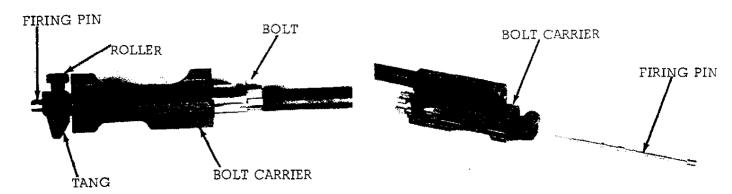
CARRIER CAP ASSEMBLY IN LINE WITH TOP OF BOLT CARRIER
